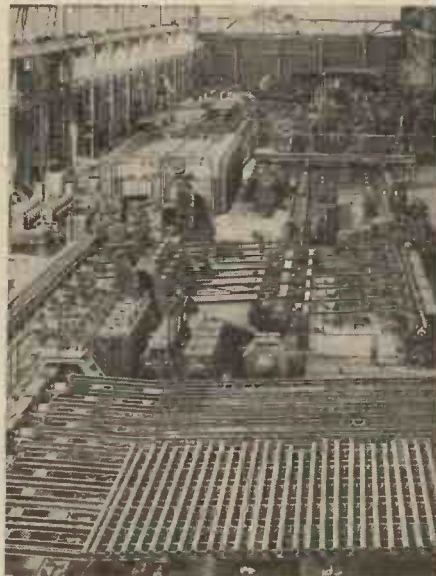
A view of the Wellman mill, showing the finished tubes in the foreground.
